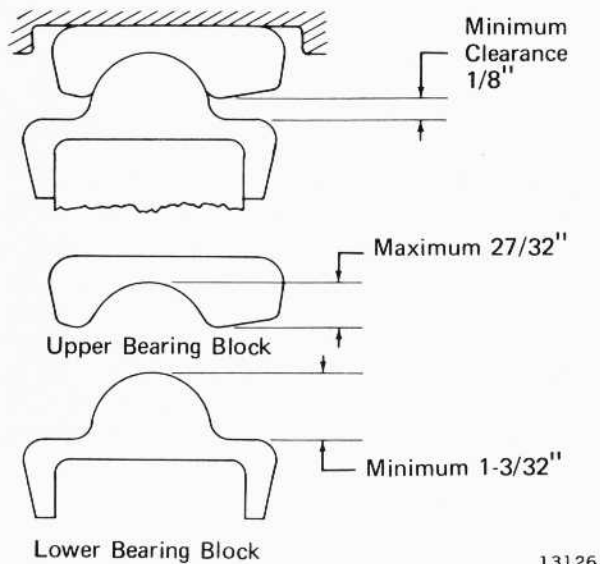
Swing Hanger Bearing Block Wear Limits
